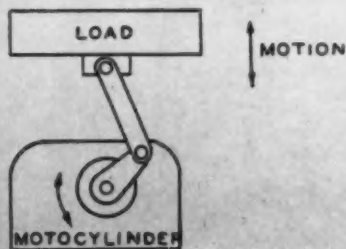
Basic operation of a motocyliner in the vertical plane.
